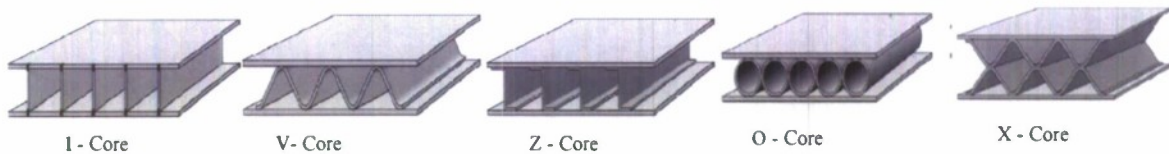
Some Examples of Prismatic Core Designs Ideal for Laser Stake Welding
